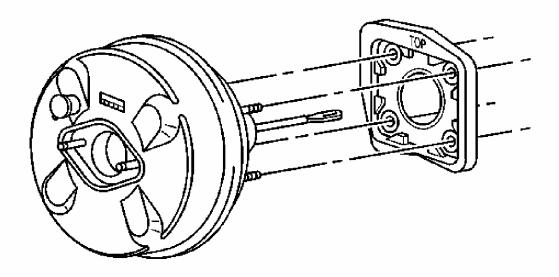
View of Vacuum Brake Booster Courtesy of GENERAL MOTORS CORP.
